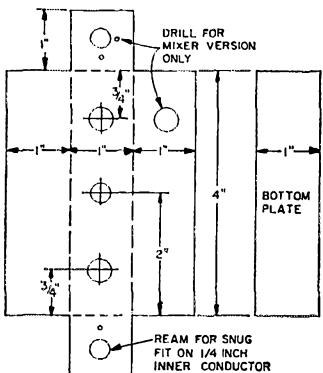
Principal dimensions of the flashing-copper case for the filter.
